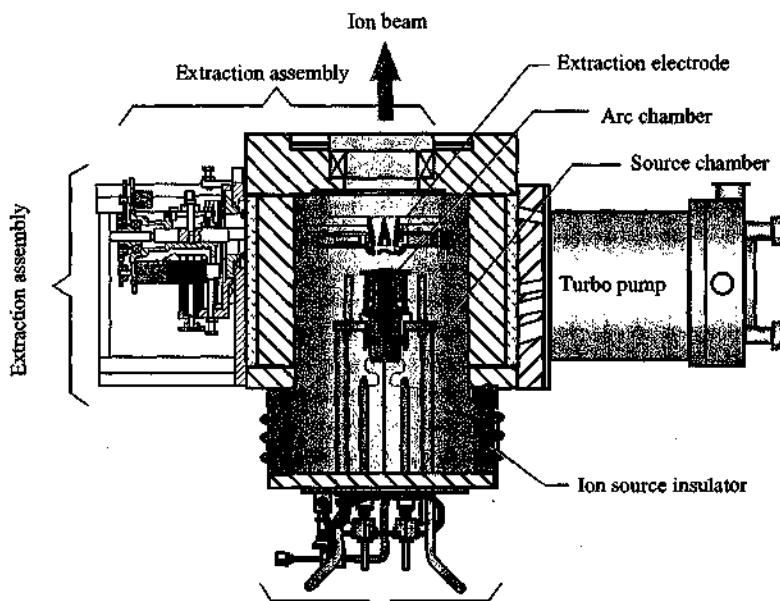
Ion Source and Extraction Assembly Housing
